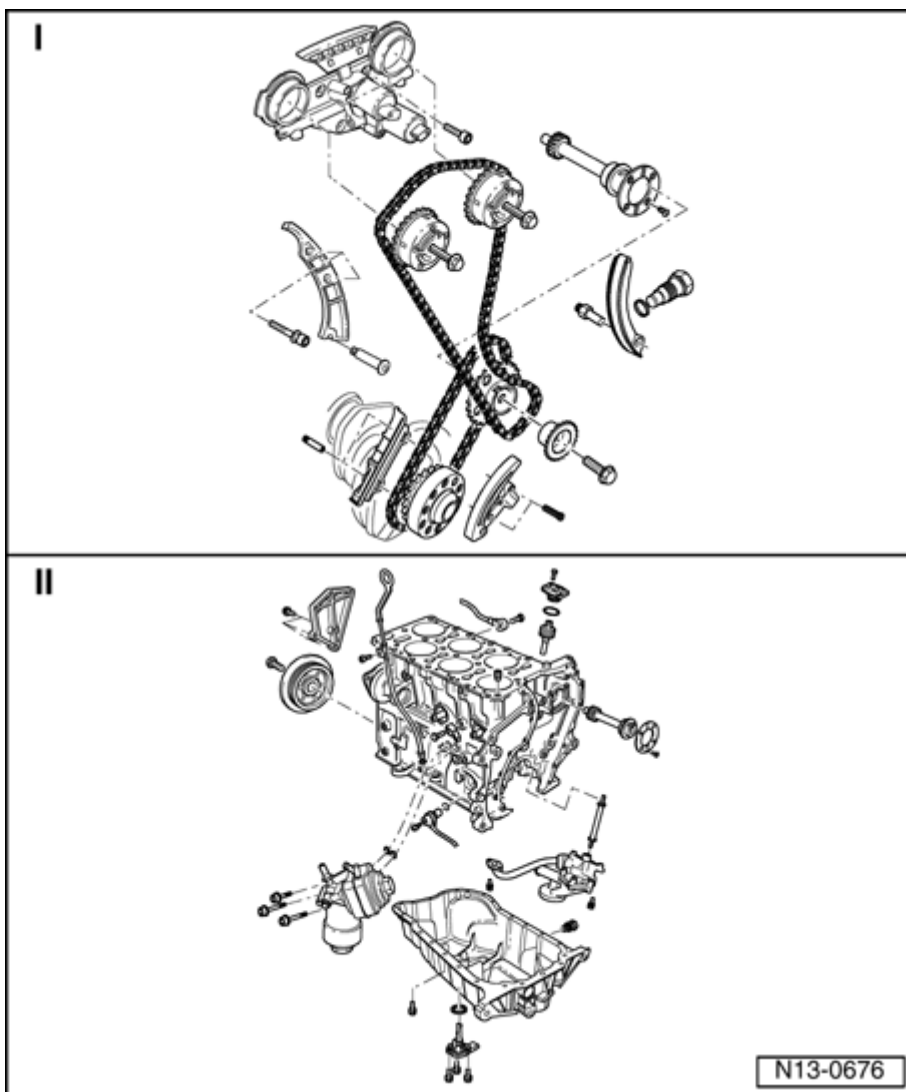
Identifying Engine, Disassembling/Assembling Parts I & II
